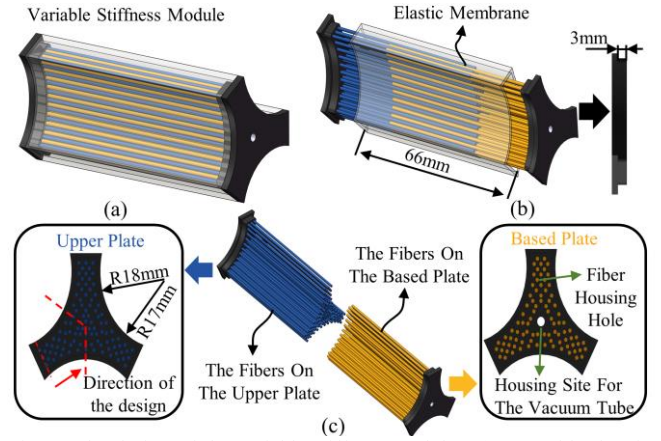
The design of the variable stiffness module. (a) Assembly drawing. (b) Explosive view. (c) Parameters of the two plates and fiber setting.
